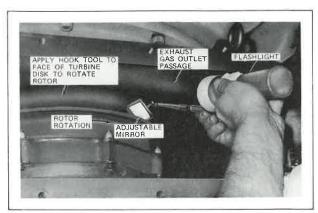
INSPECTING TURBINE-BUCKET BLADES.
